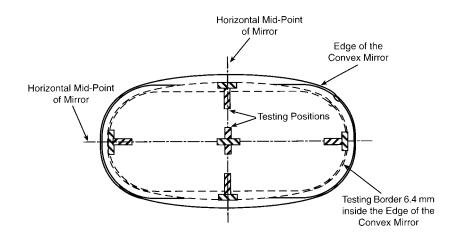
LOCATION OF TEN CONVEX MIRROR TESTING POSITIONS All dimensions in millimeters (mm)
